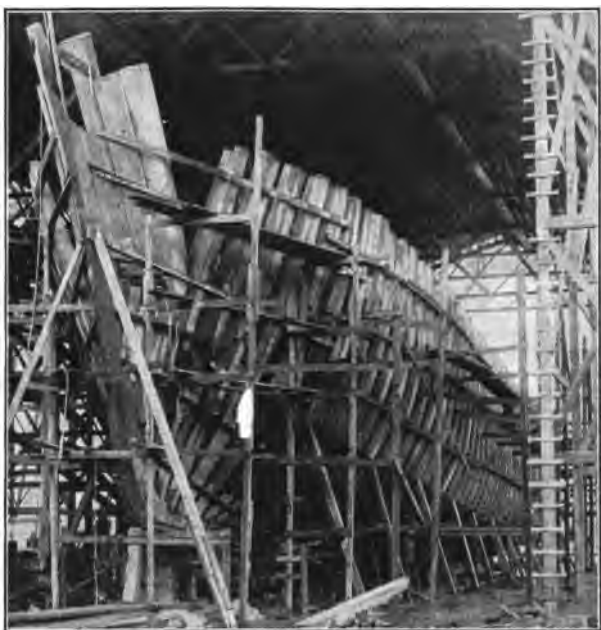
Close-up View of Ship, Showing Detail of Bow Construction.
